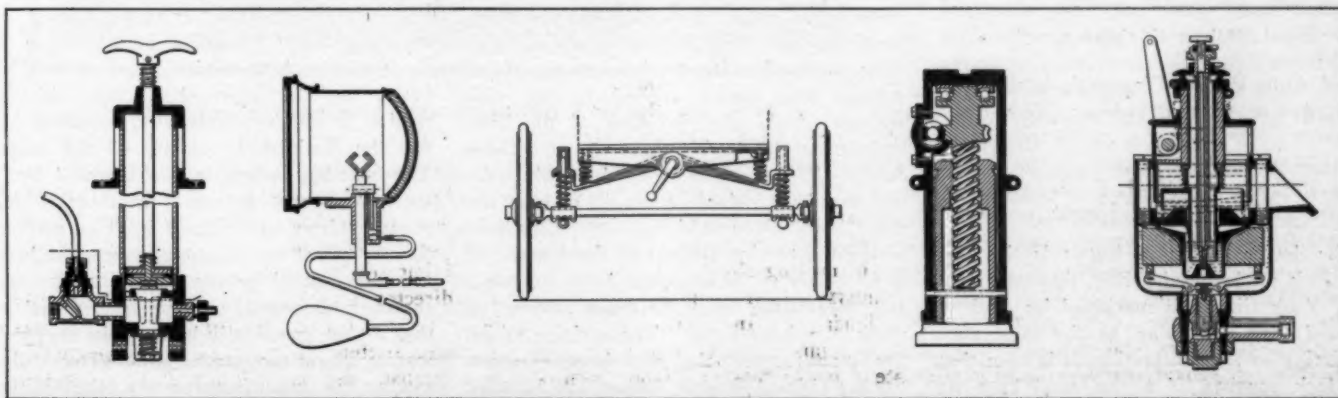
Halbleib starter. Fig. 2—Greenlaw dimming device. Fig. 3—Dearing running gear. Fig. 4—Schatz jack. Fig. 5—Weiland carbureter
